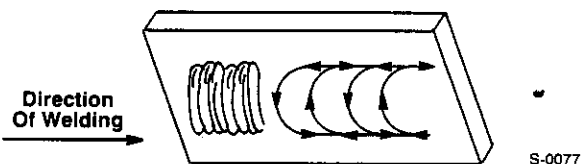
Weave Pattern – Overhead Weld
